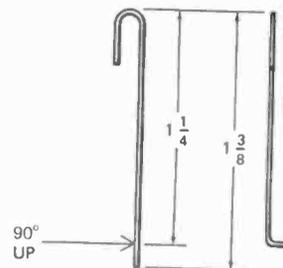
WIPER CONTACT springs are formed to connect conductive strip to the keys.
